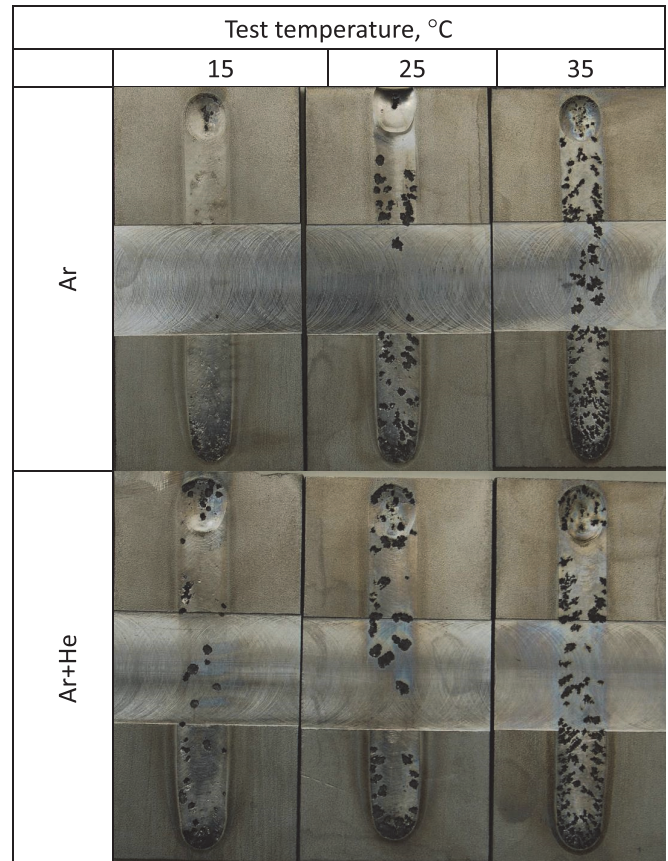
The autogenous TIG welded joint of stainless steel S82441 made with Ar shielding and Ar+He mixture and welding current of 200A after corrosion test ASTM G48 at temperatures 15, 25 i 35 °C
